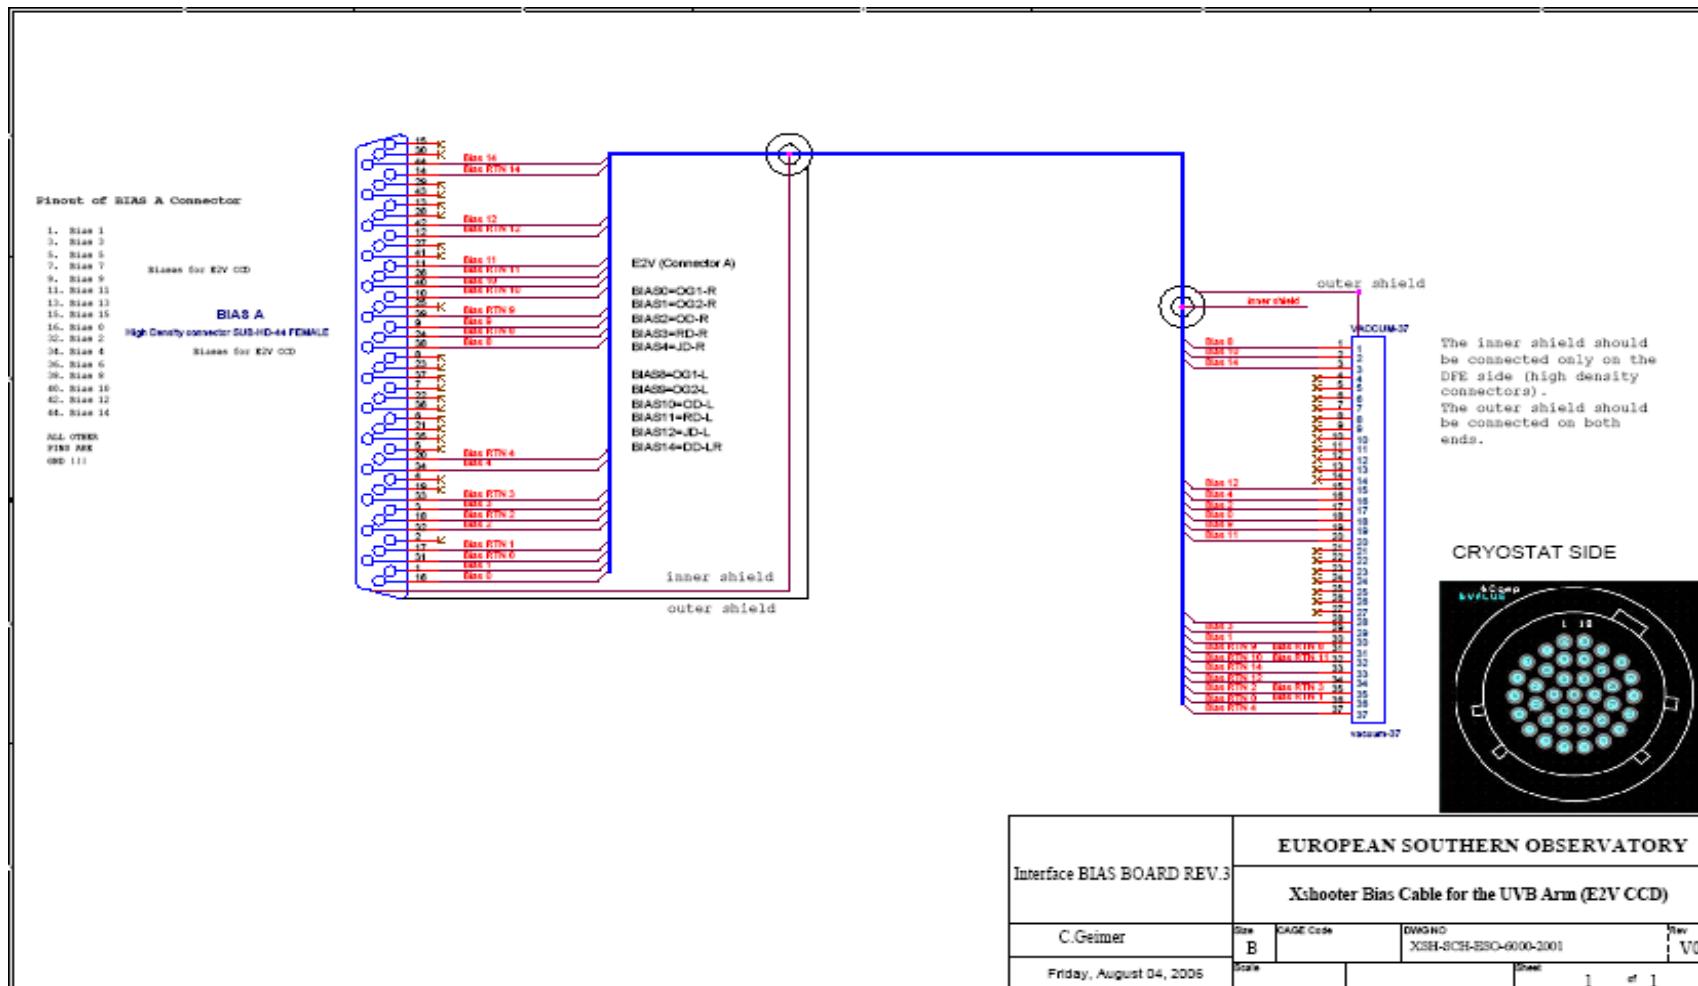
Schematic and assembly; UVB CCD Bias Cable (W1).
